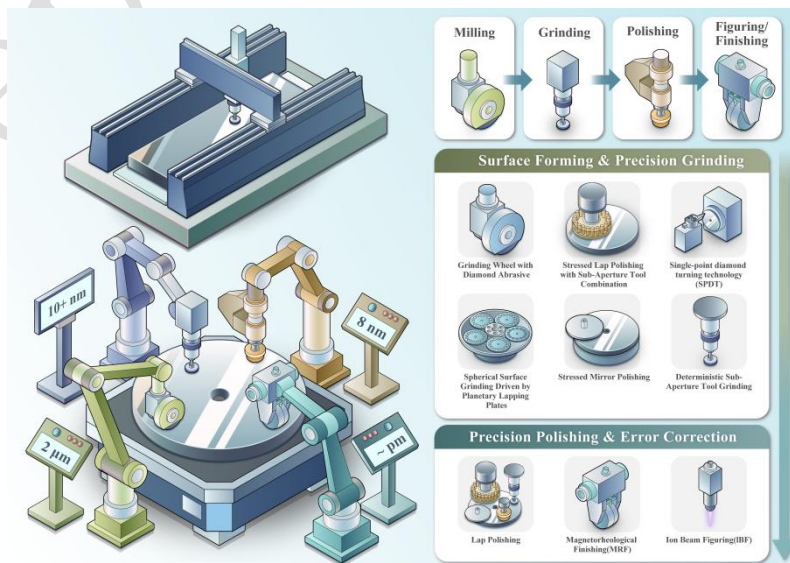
Schematic overview of the integrated engineering chain for large-aperture optical mirror fabrication.
